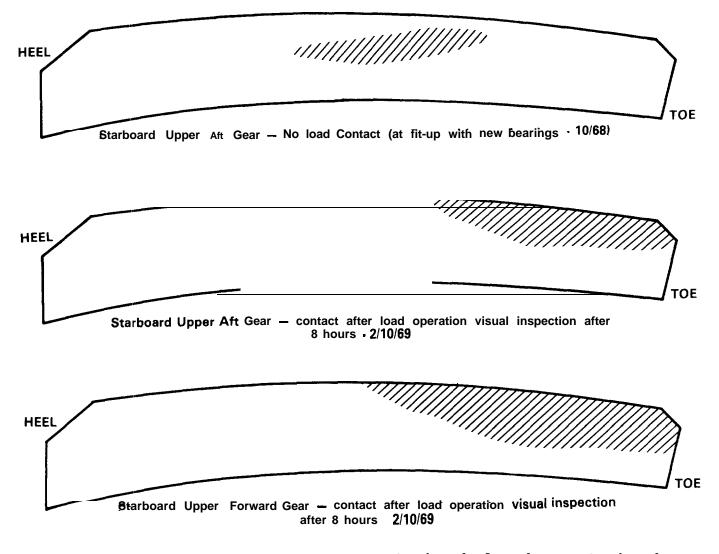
Tooth Contact Pattern: Upper Starboard Aft and Upper Starboard Forward Gears, at 8 Hours of Operation
